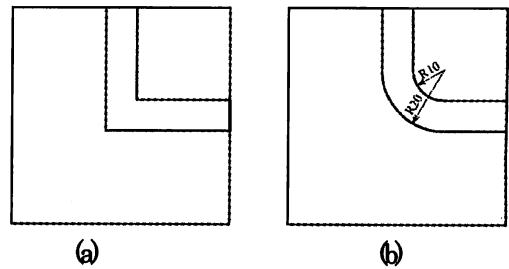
Shape of cross section of mold. (a):ECAP mold, (b):Present mold.
